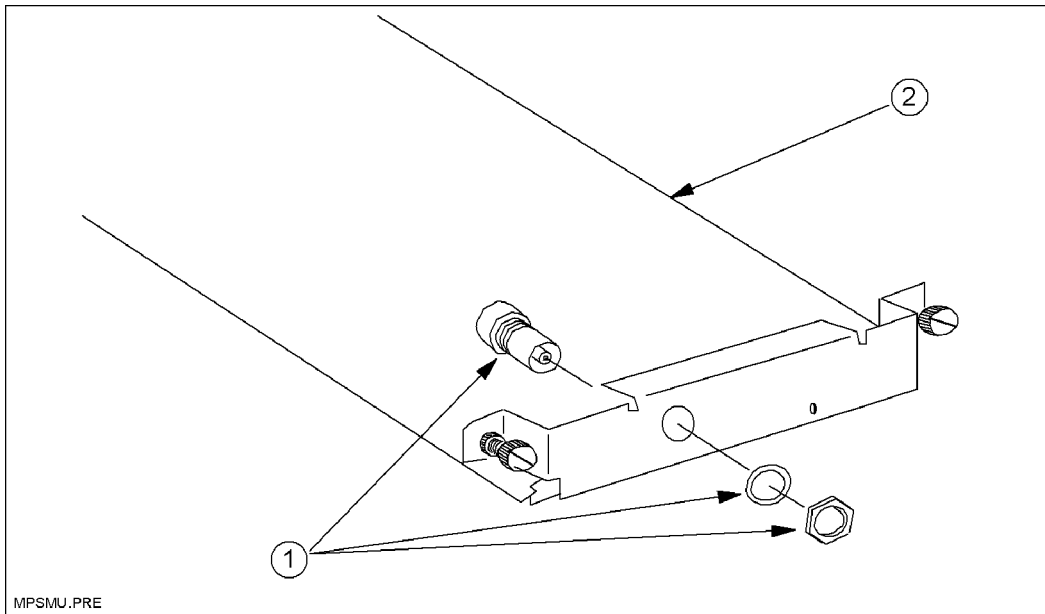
MPSMU Module (04155-66544) Parts Location
